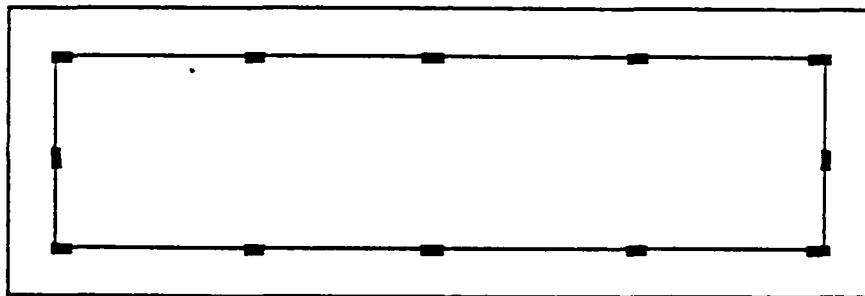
Location of Spot Welds on the Cover plate of Pocket Plat Configuration.
